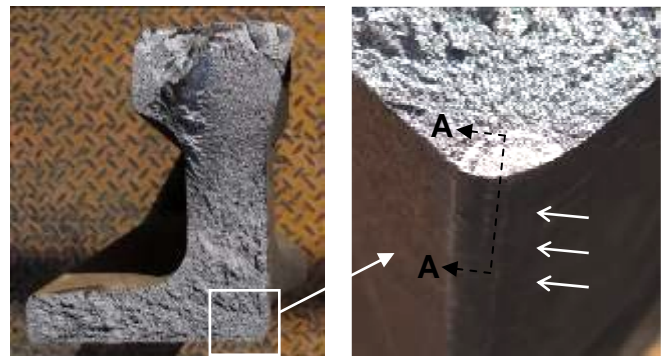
(L) Wing Rail Fractured Surface indicating Fracture Origin and Fracture Initiation Grind Marks (Multiple Arrows); (R) Cross-Section taken for Microstructural Analysis, A-A
